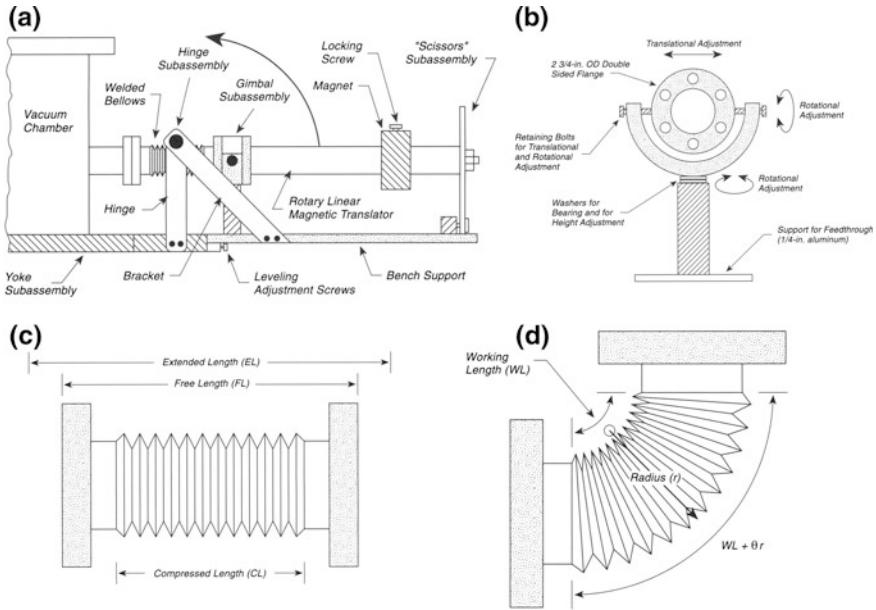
Folding linear magnetic translator. a Side view. b Gimbal subassembly. c Welded bellows—dimensional definitions. d Bellows in bent configuration
